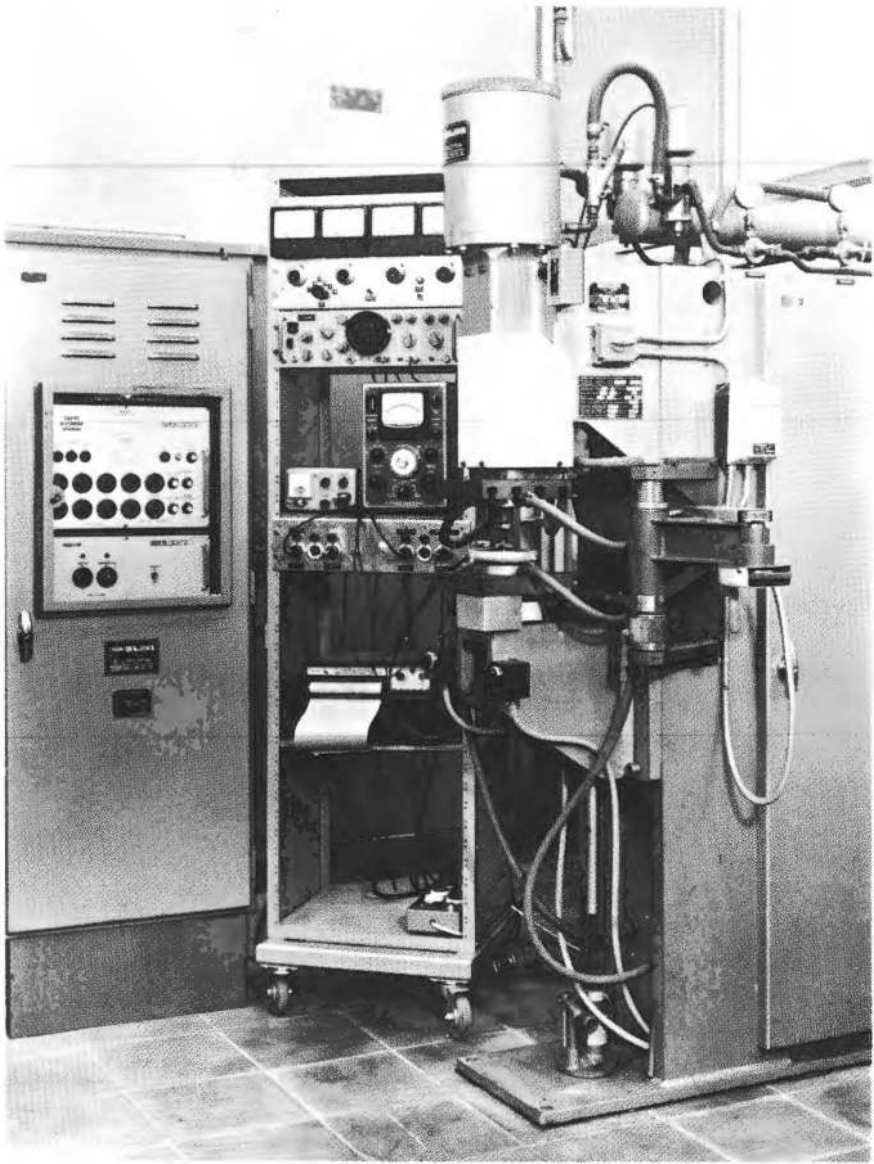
The Experimental Equipment. From left to right, welding control unit, instruments rack, press welder. In the rack from top to bottom, r.m.s. ammeter unit, oscilloscope, displacement transducer power source and strain indicator, recorder pre-amplifier, recording oscillograph
